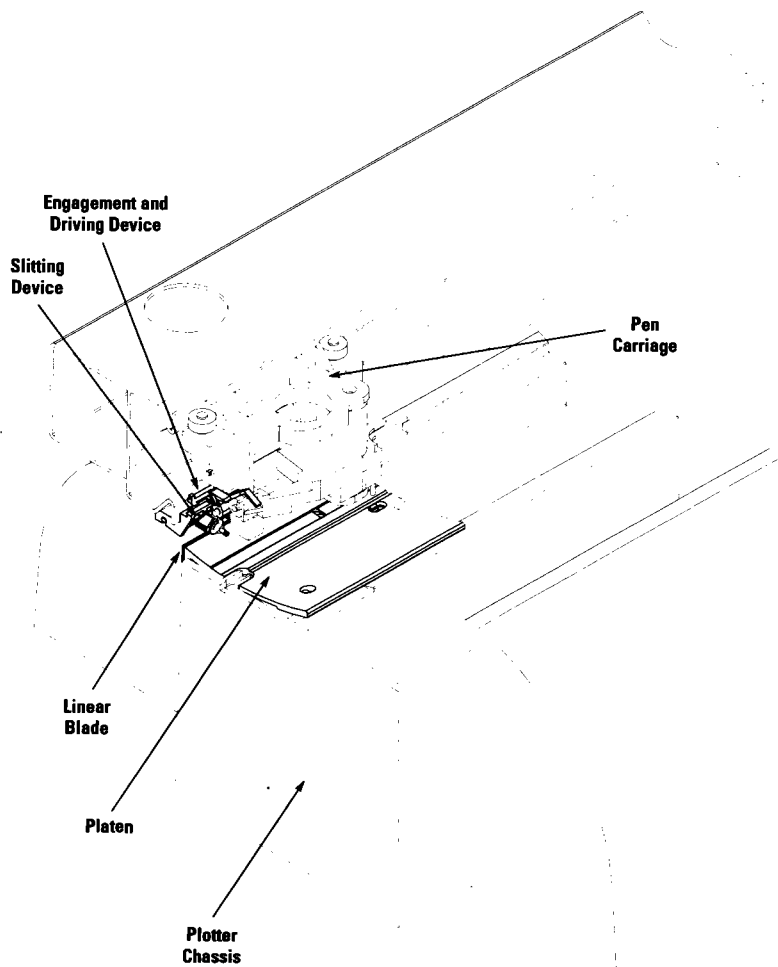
The parking position of the cutter is at the left end of the pen carriage guide arm.
